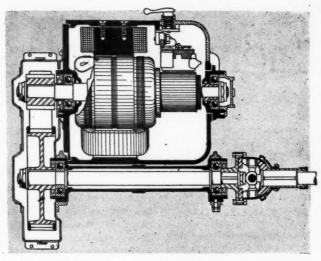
Sectional plan of the Baker power plant, showing chain-driven counter shaft arranged at side of motor
